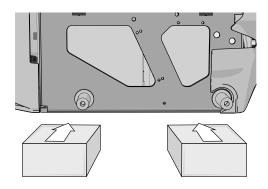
Use two blocks on each side of the chassis box. The wheels has been removed in this figure for better viewing.
